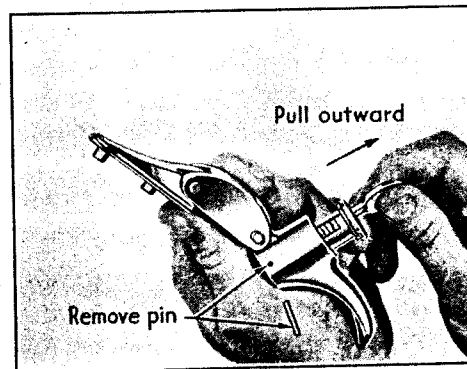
After removing the pin from a trunk lock, the cylinder may be pulled out.
